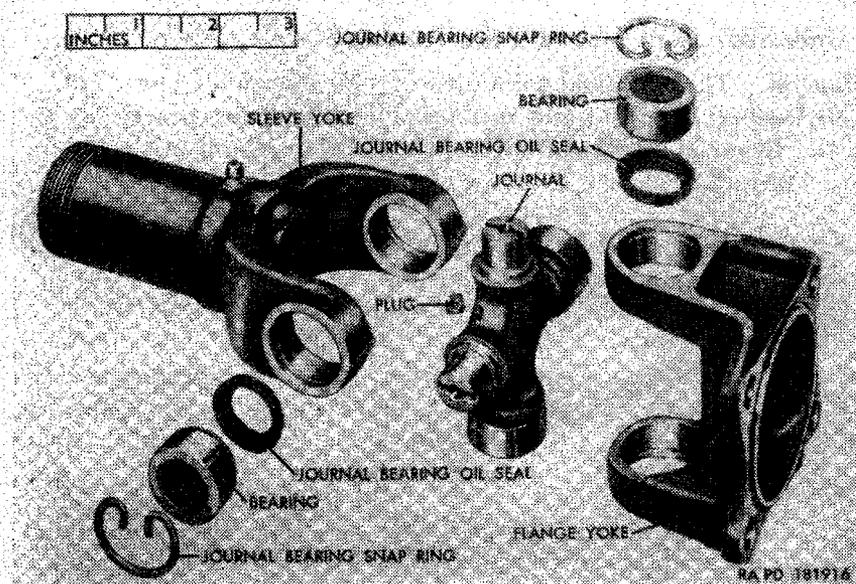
Rear propeller shaft front universal joint and rear propeller shaft-to-transfer flange yoke—partially exploded view.
